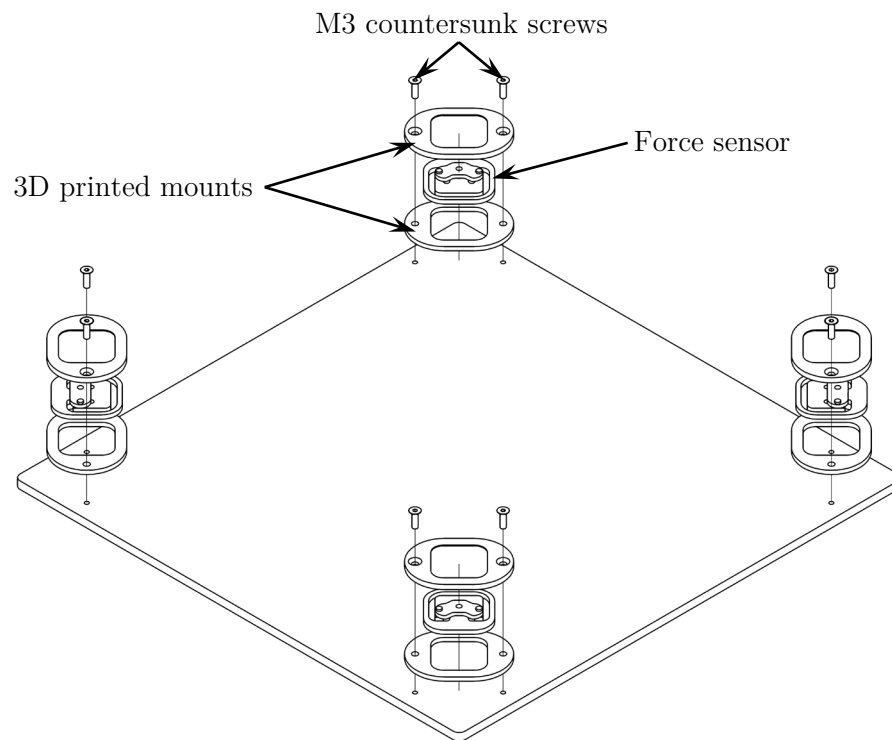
Exploded view of the weighing plate assembly (bottom view)
